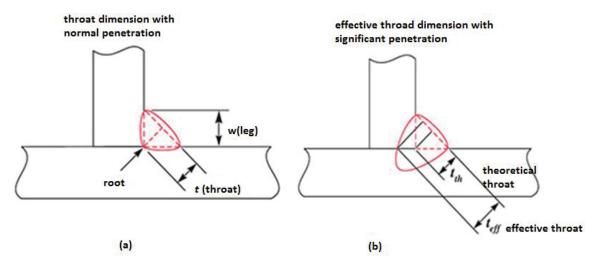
Definition of weld throat in fillet weld [5].
